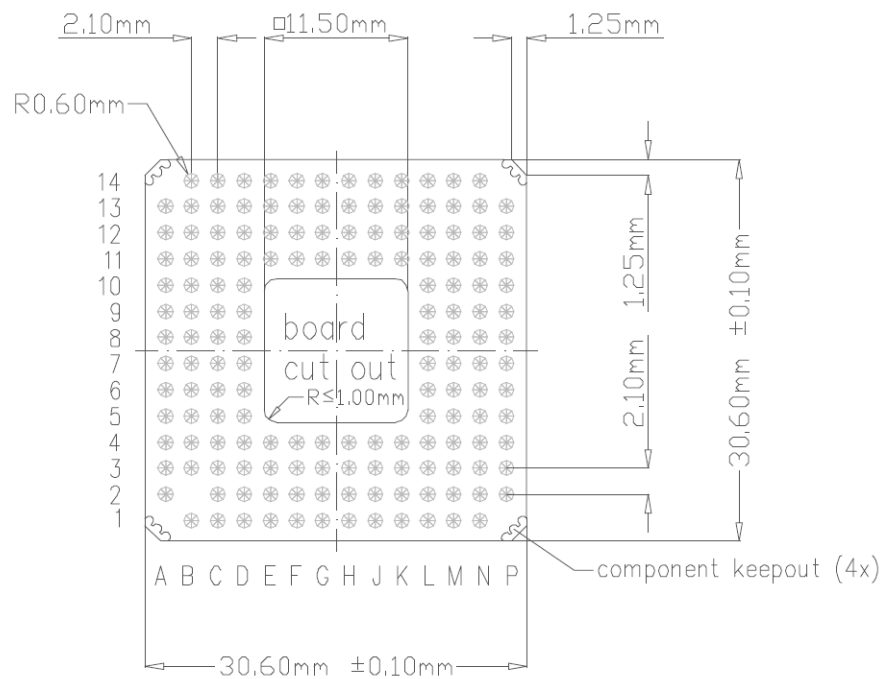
TQMLS1012AL dimensions, recommended PCB land pattern, top view through TQMLS1012AL
